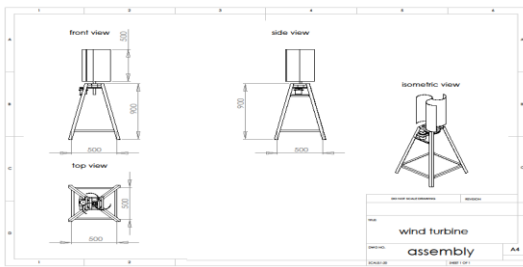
Showing the dimensions of wind turbine dimensions of blade
